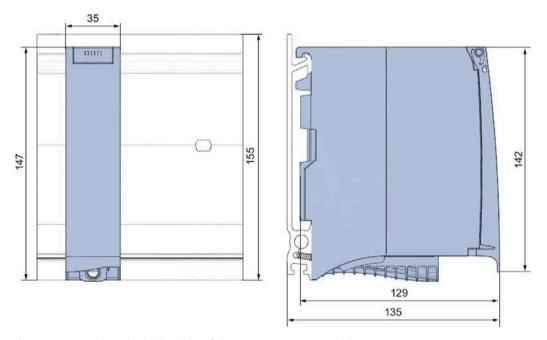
Dimensional drawing of the PS 25W 24VDC module
